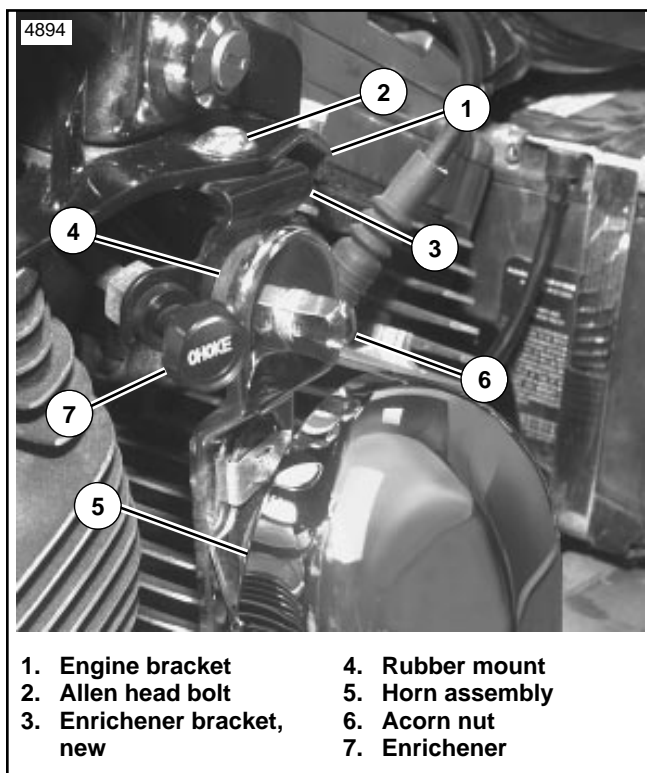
Horn Assembly Installation - 1992 - 1994 Models
